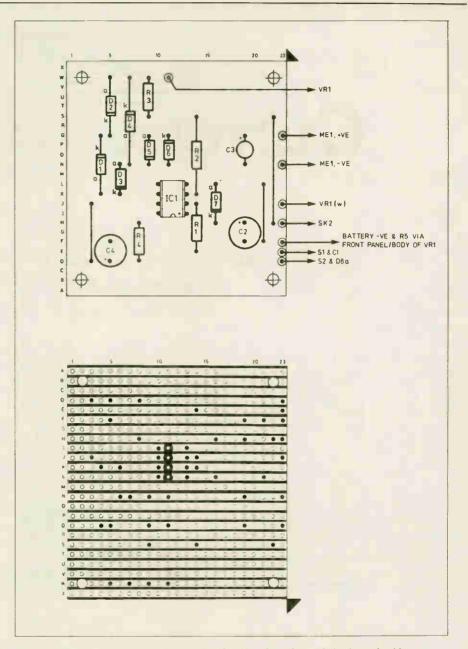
Circuit board component layout, details of breaks to be made in the underside copper tracks and wiring details to the front panel. The VRI lead marked with a "w" should be taken to the wiper or center tag of the potentiometer.
